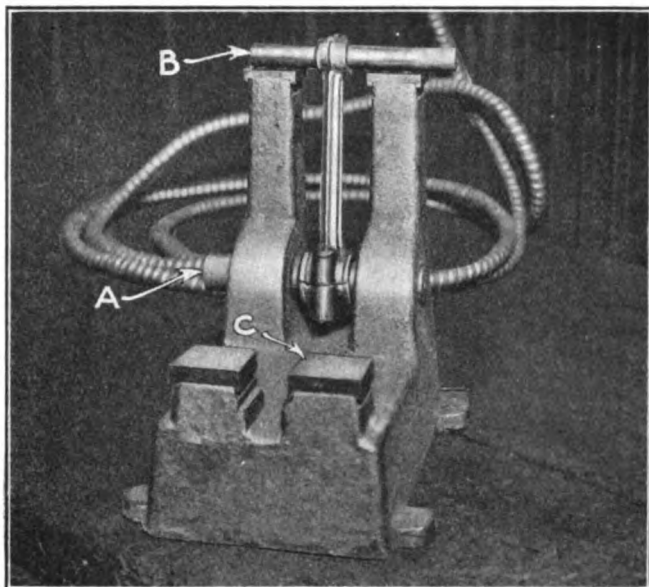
FIXTURE FOR TESTING STRAIGHTNESS OF CONNECTING RODS
